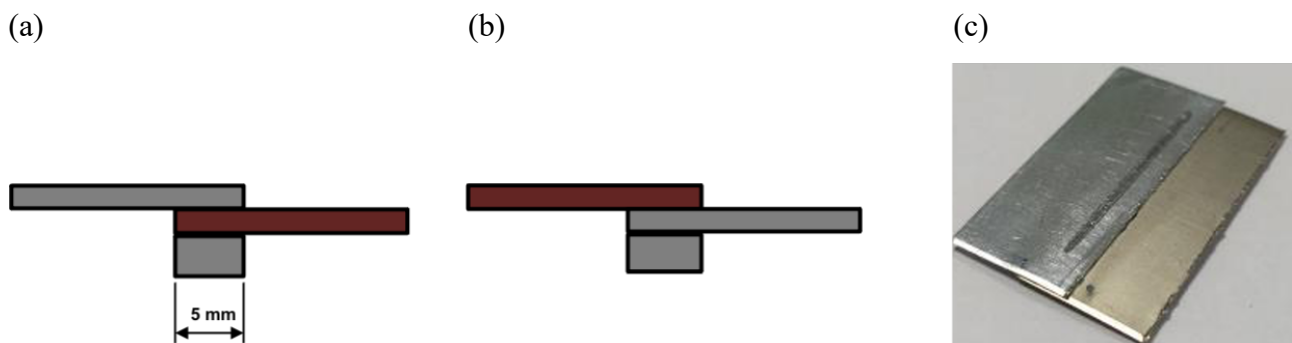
Welding configuration for tab-tab-busbar(a,b), example of welded sample(c).
